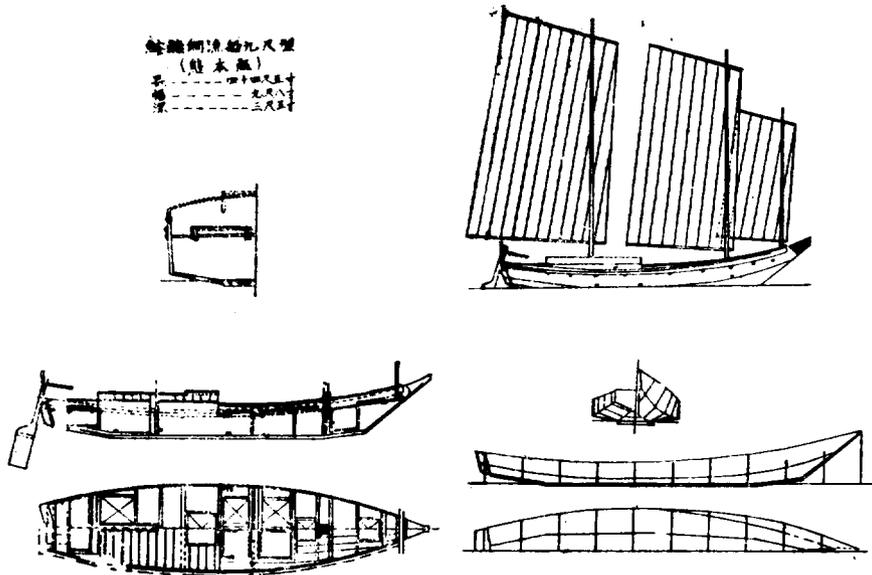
Principal hull drawing 90 KUMA MOTO in 1919
